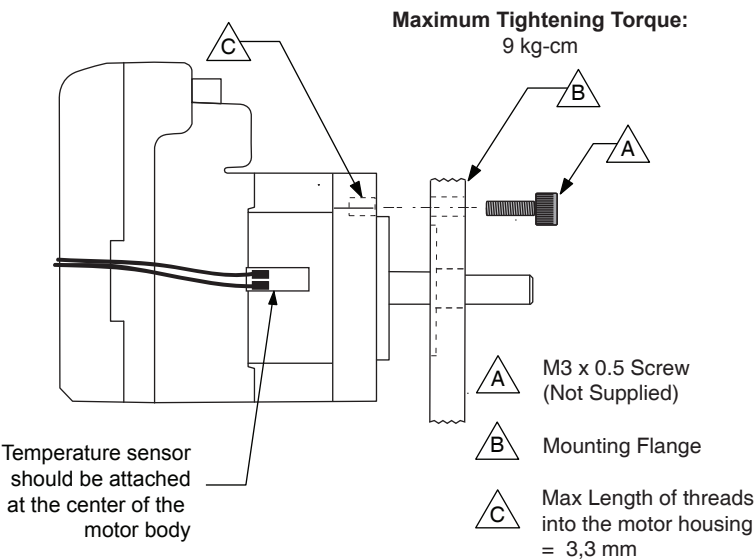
Lexium ILT2V36 mounting and drill pattern
